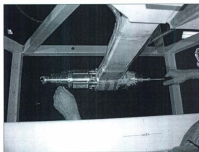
Using feeler gauges and a socket driver to adjust the gap distance.
